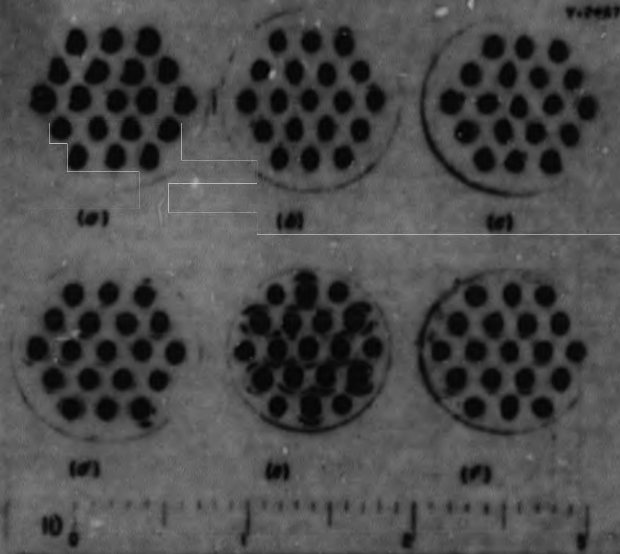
Typical Cone-Arc Welds of 1/8-in. Type-304 Stainless Steel Header Sheets and Type-316 Stainless Steel Tubes, 0.10 in. OD, 0.010-in. Wall Thickness.
